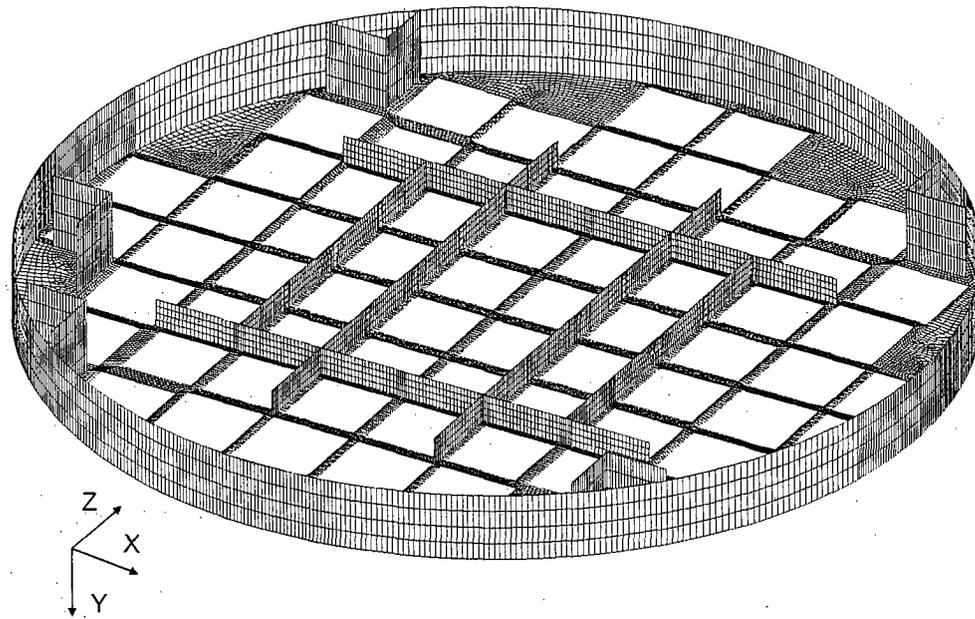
A.4.4.2-3 MPC-LACBWR Bottom Weldment Finite Element Model
